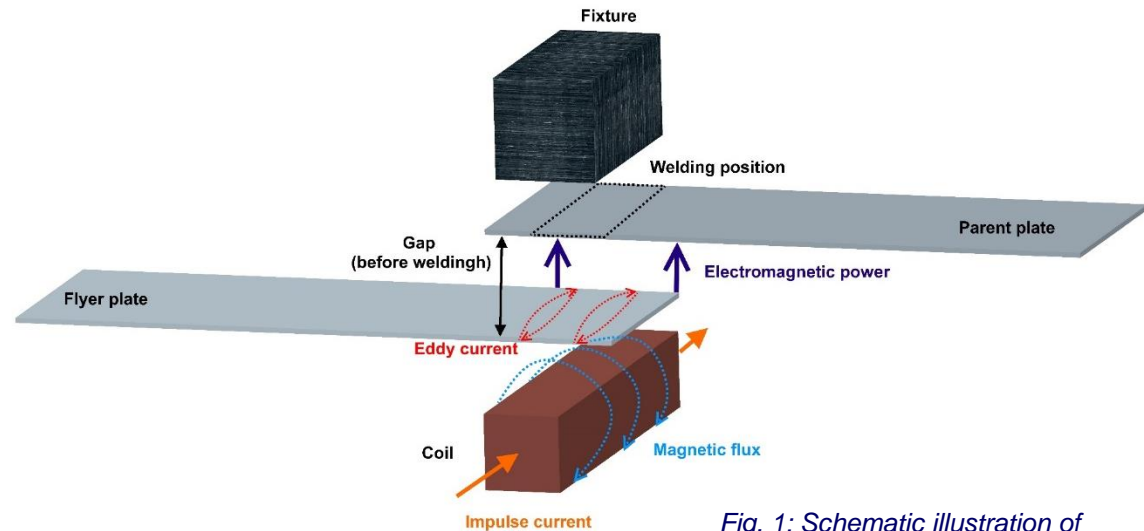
Schematic illustration of Magnetic Pulse Welding [Lee07]
